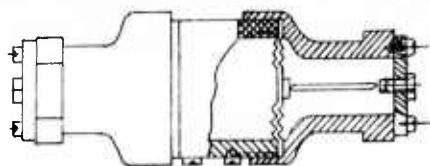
Schematic drawing of the fluid accelerometer [60]
